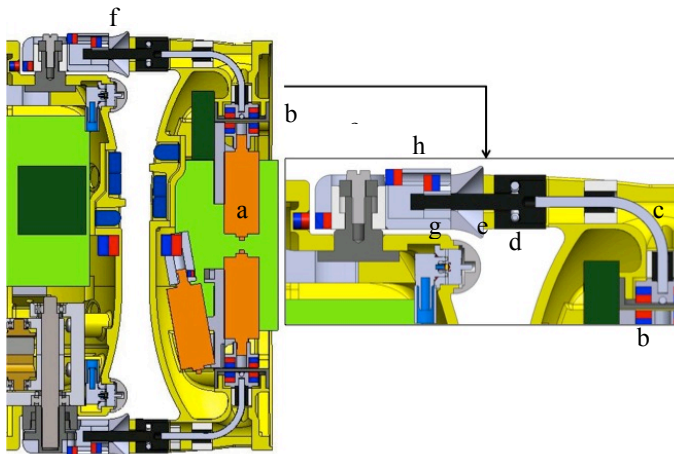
Longitudinal section of the docking system. The rear shell holds: a. motor, b. magnetic coupling, c. flexible shaft, d. axial bearings and e. screw. The frontal shell holds: f. connector, g. nut and h. magnets.
